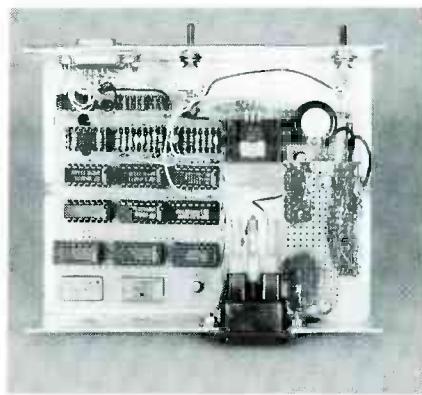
THE AUTHOR'S PROTOTYPE. Perforated construction board and wire-wrap techniques were used to assemble the project.
